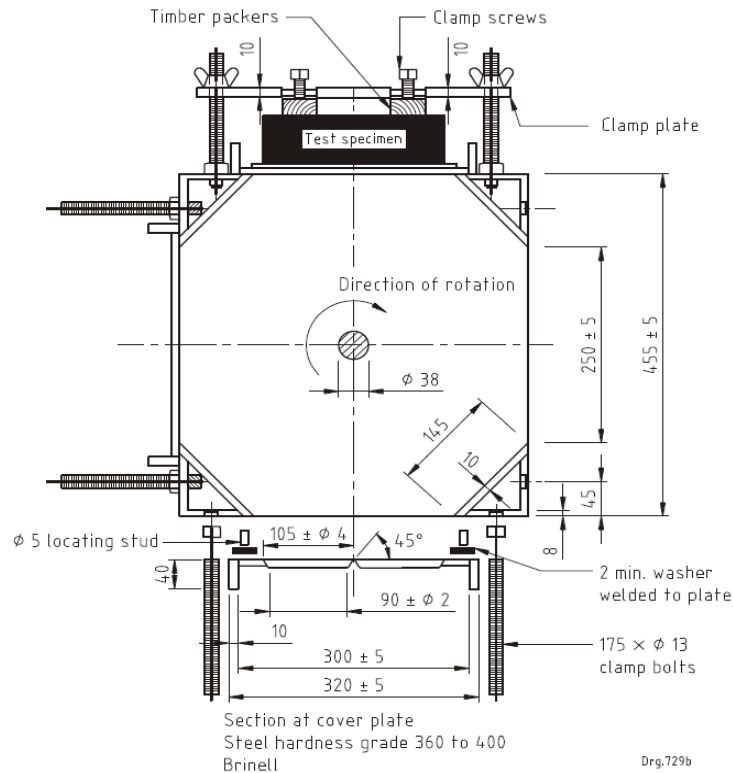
Tumbler\_Section (Dimensions in mm)
